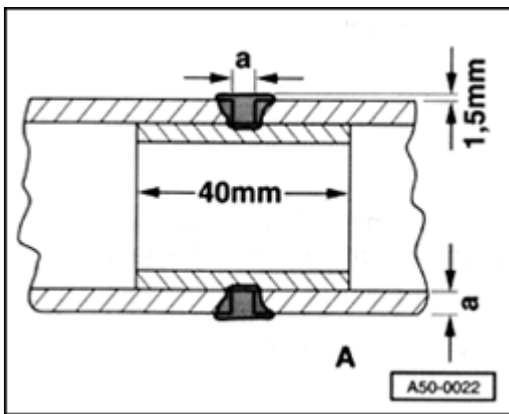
Shortening Each Welding Groove By 1 Material Thickness
